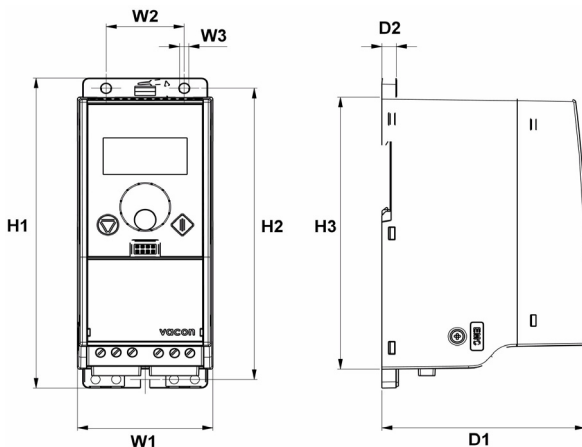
Vacon 10 dimensions, MI1-MI3
